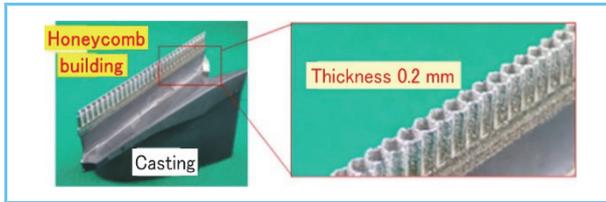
Honeycomb seal building on thin plate using chamber-free PBF
